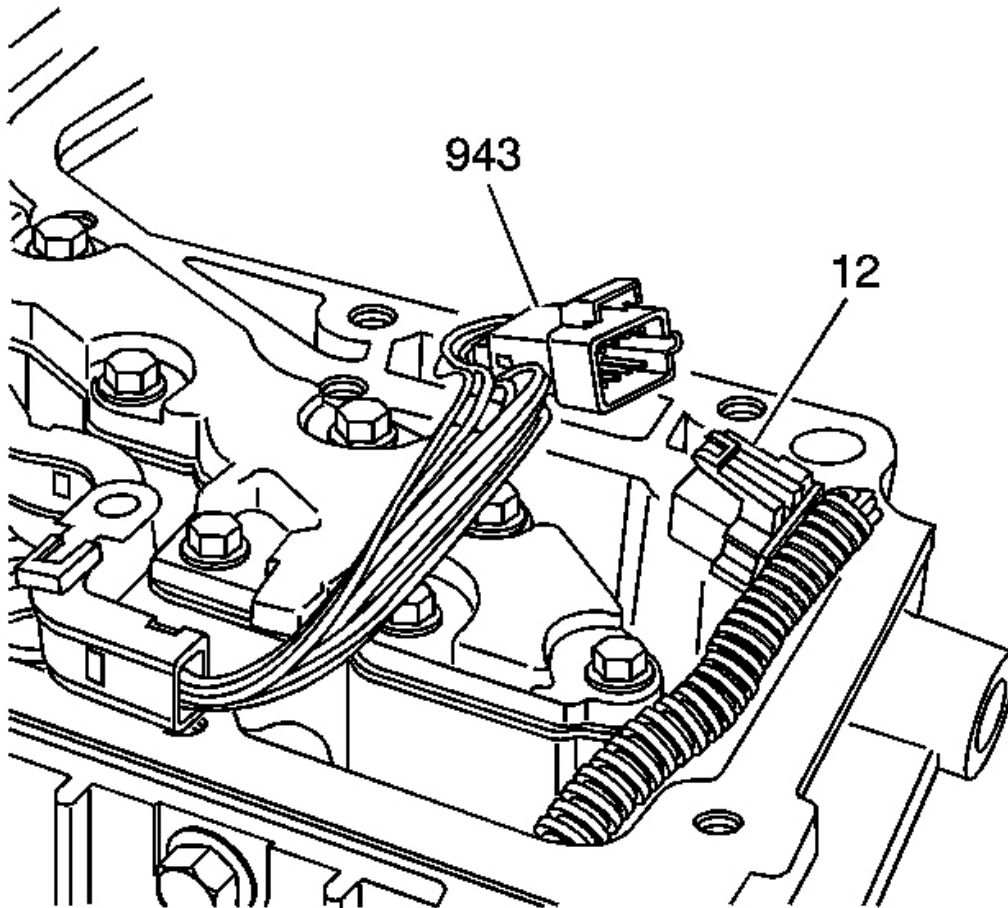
View Of Wire Harness Extension & Upper Control Wire Harness
